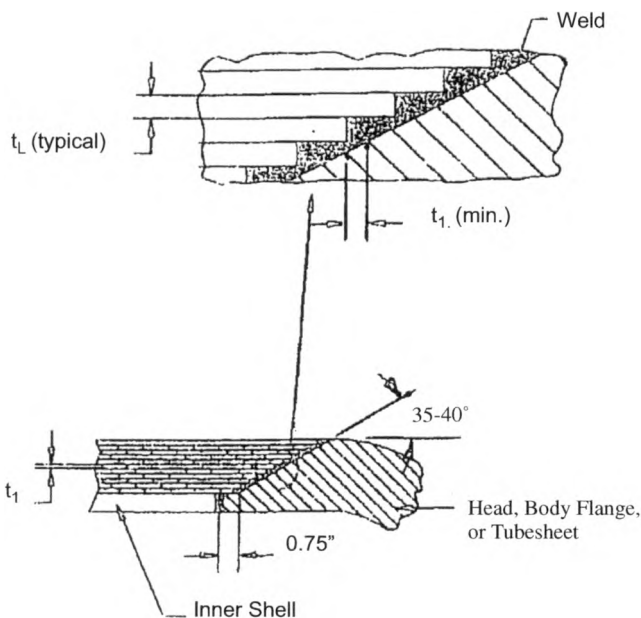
Typical head, body flange, or tubesheet attached to layered section.
